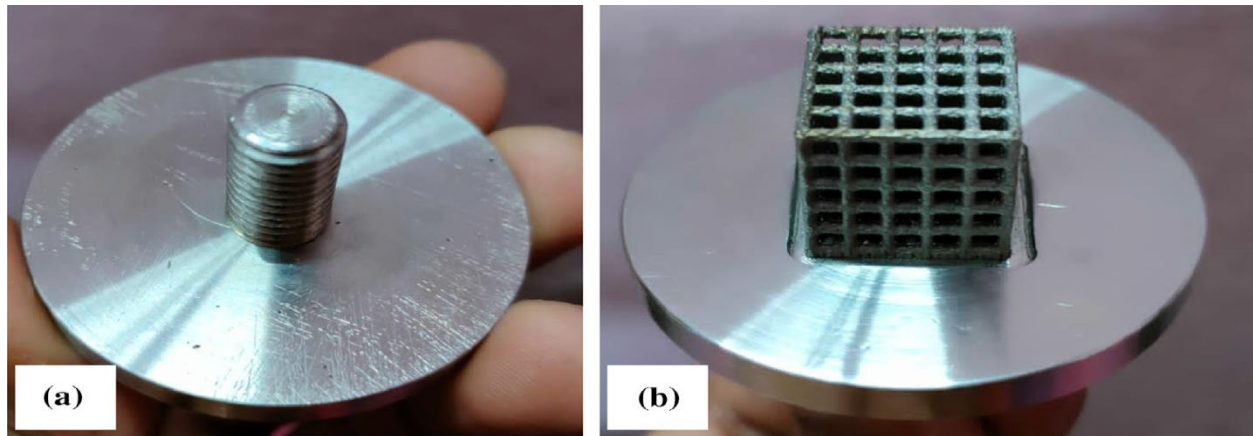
Upper HSS plate to be fitted in top part on INSTRON machine, b lower HSS plate where samples will be kept and to be fitted at the bottom part on INSTRON machine.
